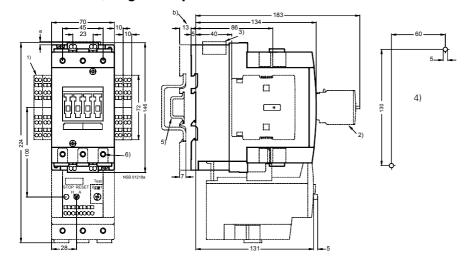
3RT10 4 contactors (Cage Clamp-connection) with surge suppressor, auxiliary contact blocks and installed overload relay
